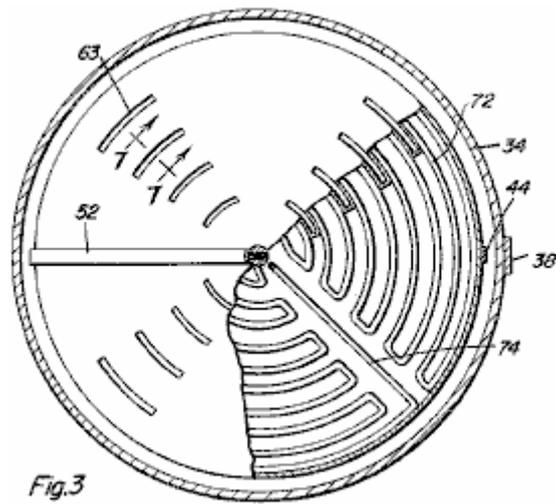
is a sectional view taken substantially through a plane indicated by section line 3—3 of Fig.2.
